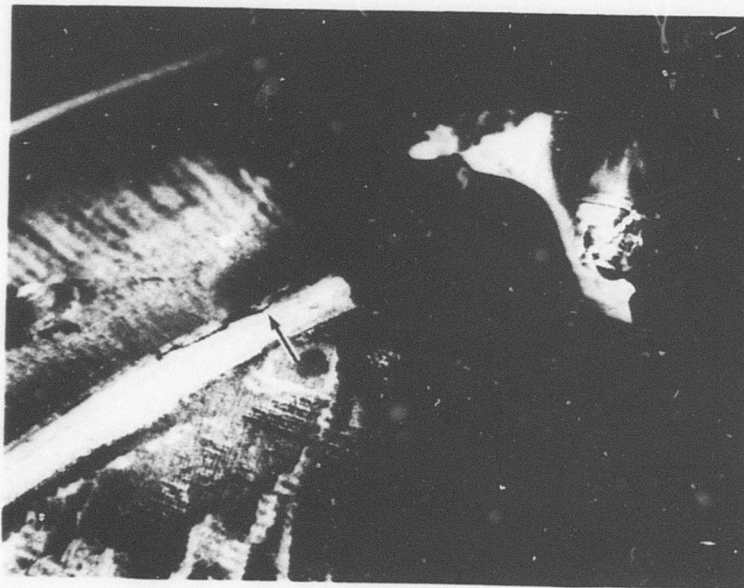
Crack in the Input Pinion Roller Bearing Web-Housing Bond After Failure, Right Side.
